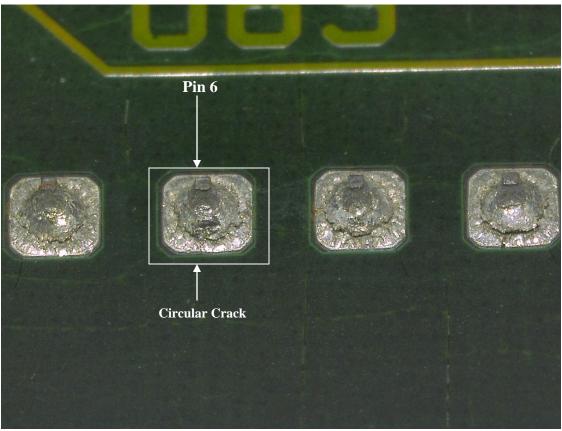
PWB 191 - U63, Pins 4 - 7 (Wave Solder Side, Sn Finish)
